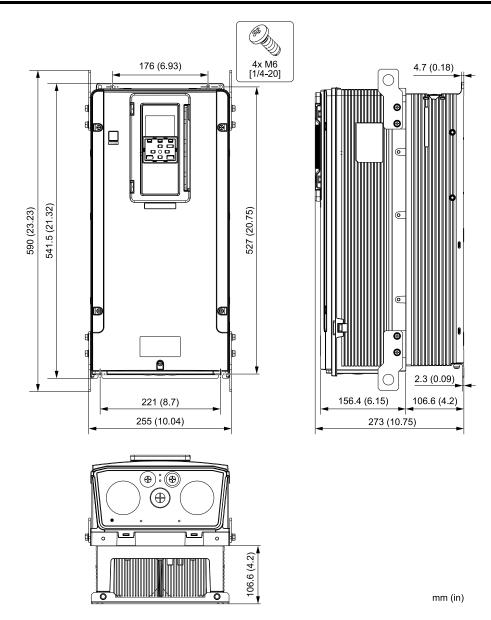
Exterior and Mounting Dimensions Diagram 5
